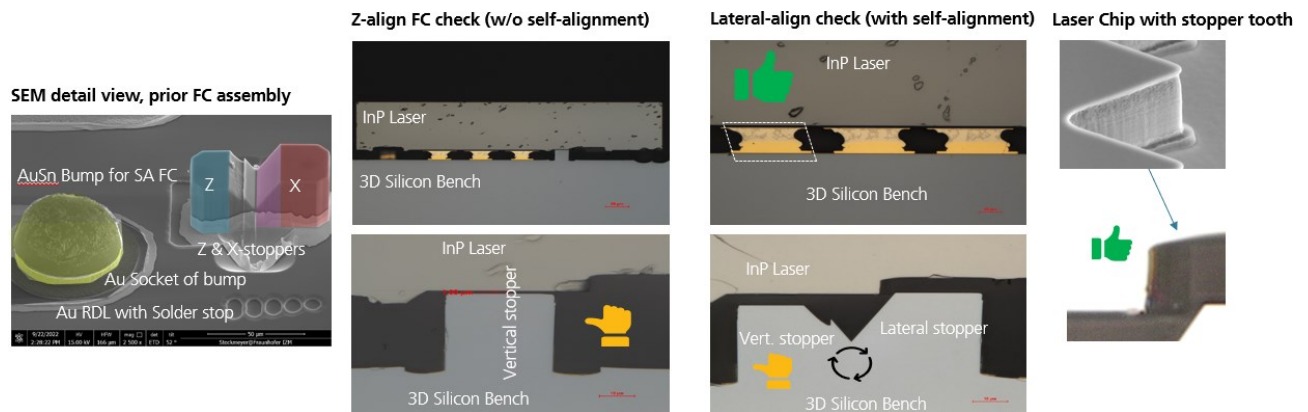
passive aligned flip chip laser with solder self-alignment (FhG-IZM)
